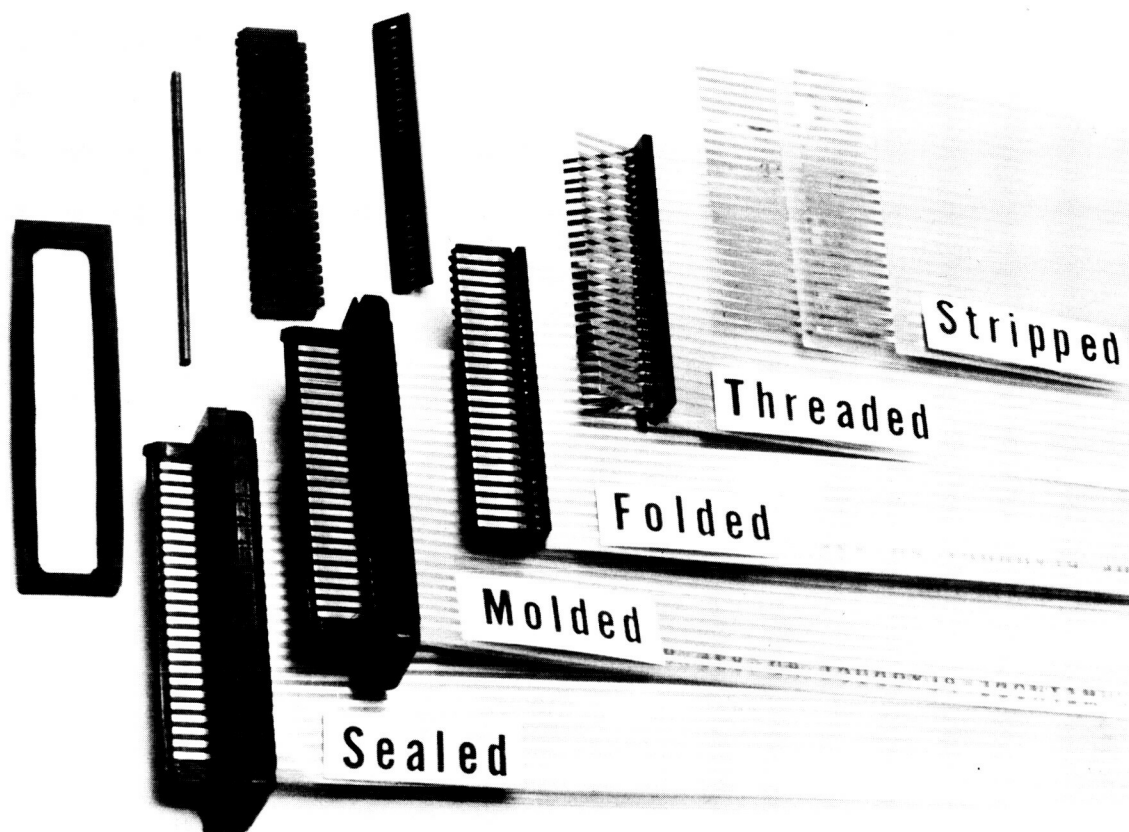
MOLDED PLUG ASSEMBLY SEQUENCE
